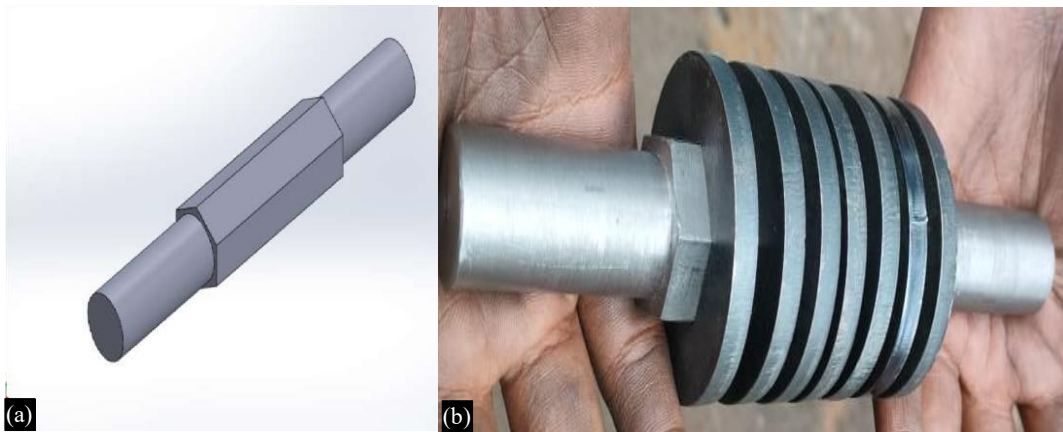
(a) Design of shaft; (b) Fabricated shaft
